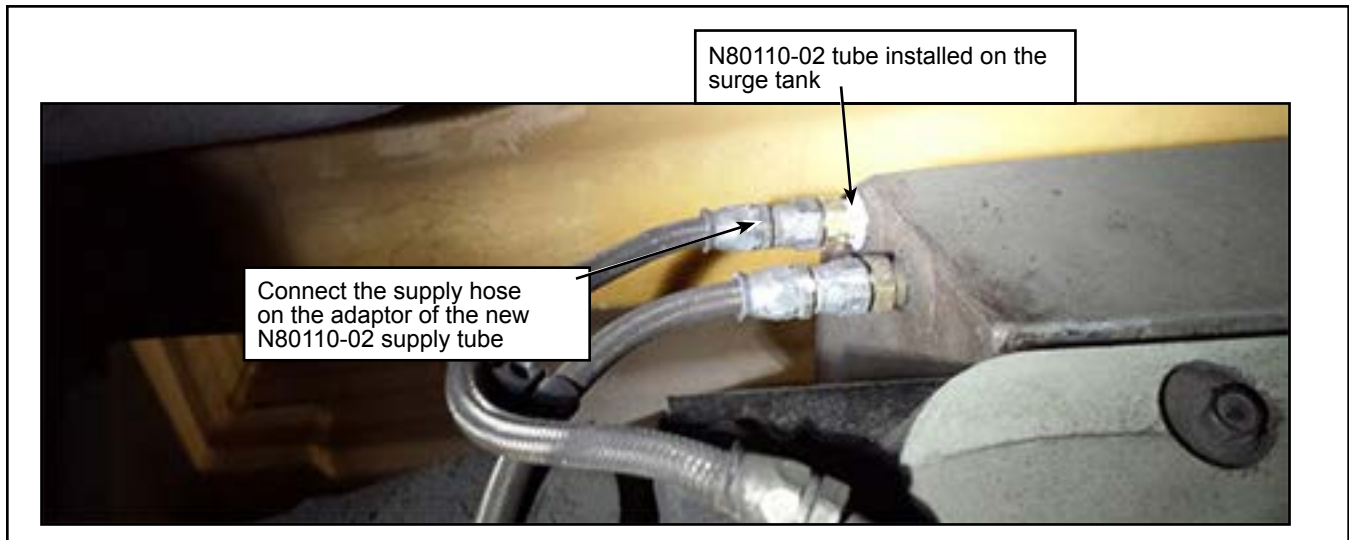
Supply Tube N80110-02 Installed on Surge Tank
